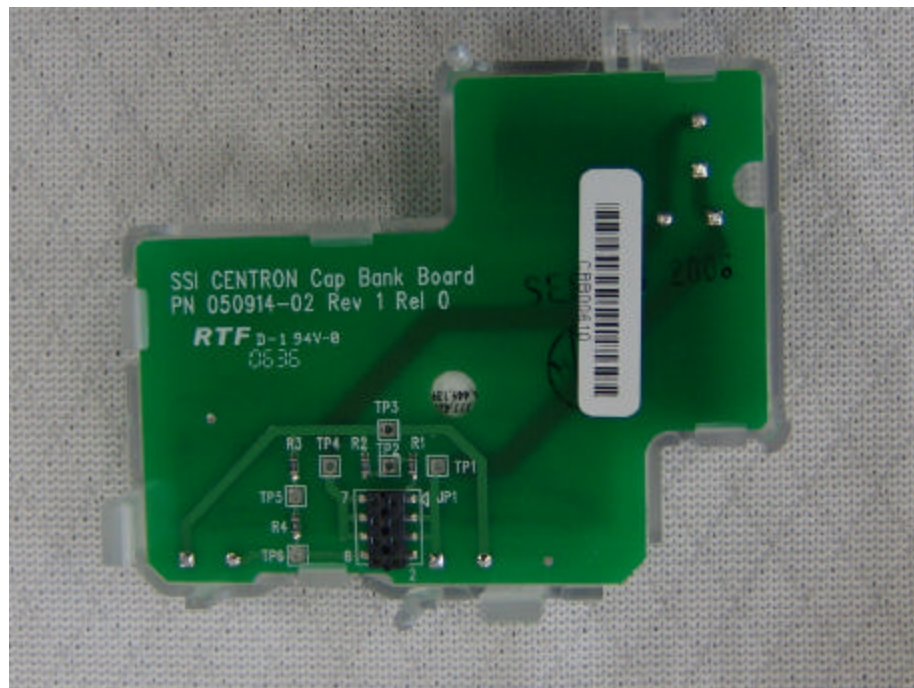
SmartSynch Capacitor Bank Board (CBB) – Back View
